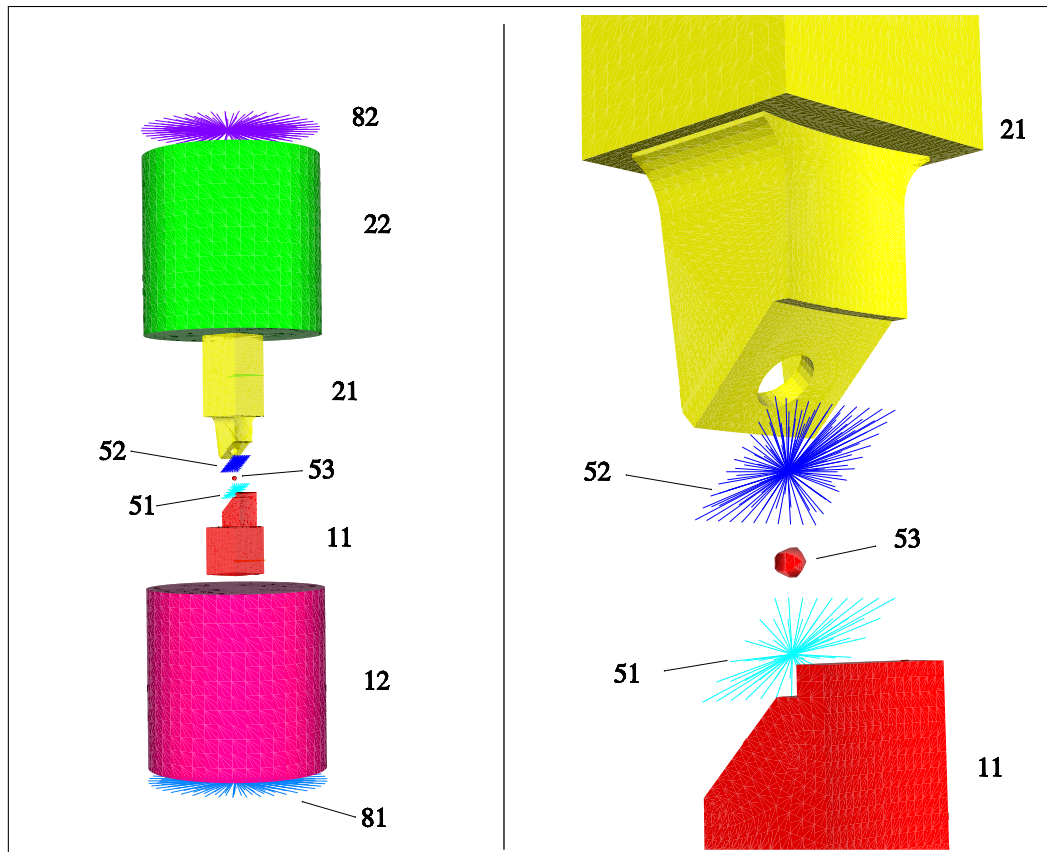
Exploded view (left) of model and (right) zoom view of joint
